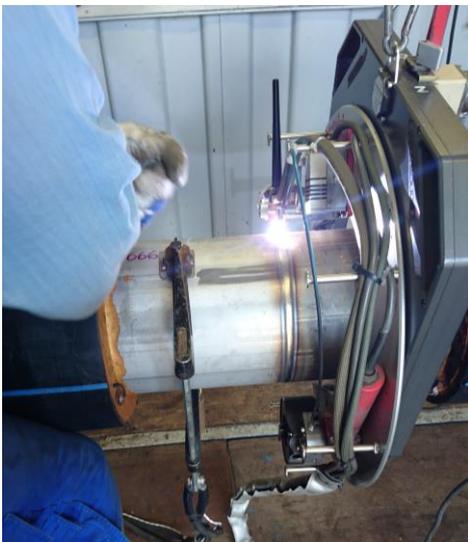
Orbital TIG welding head in action with pulsed current; during the phase of high intensity (pulse current) full penetration is achieved
